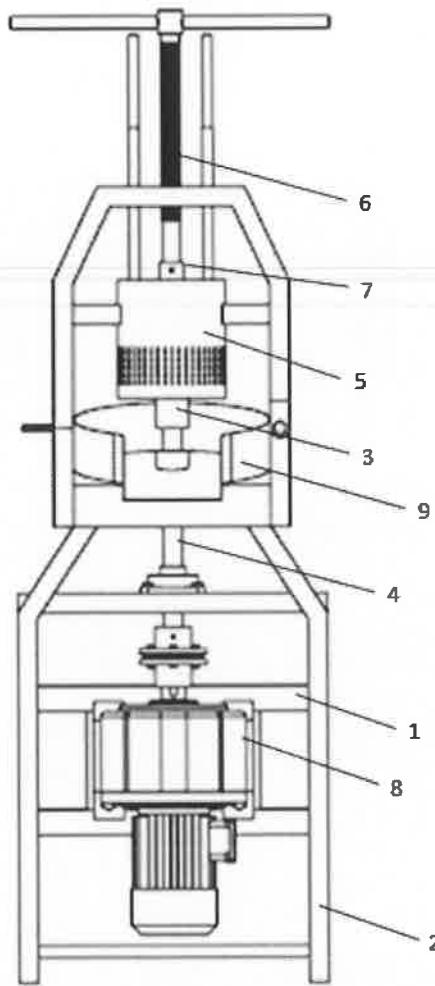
Drawing of a bench-top machine for oil palm mesocarp separation.
